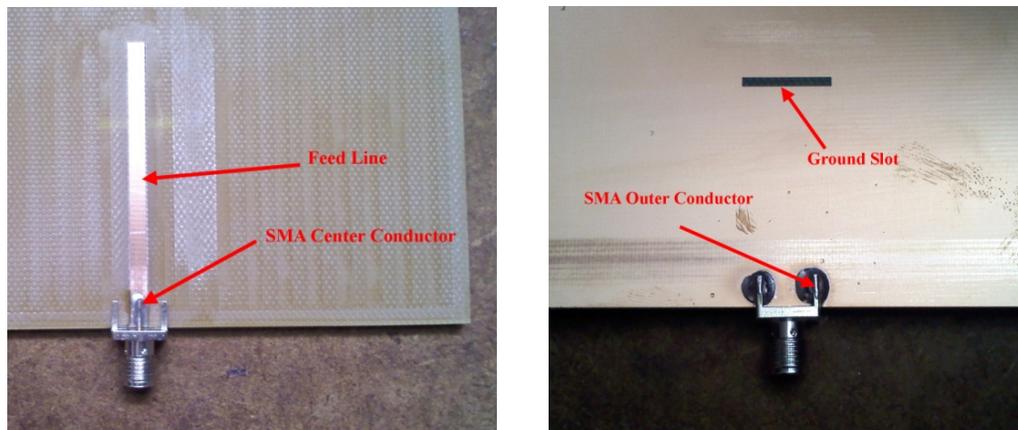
SMA Connector Soldered on Double Sided FR4 Board
